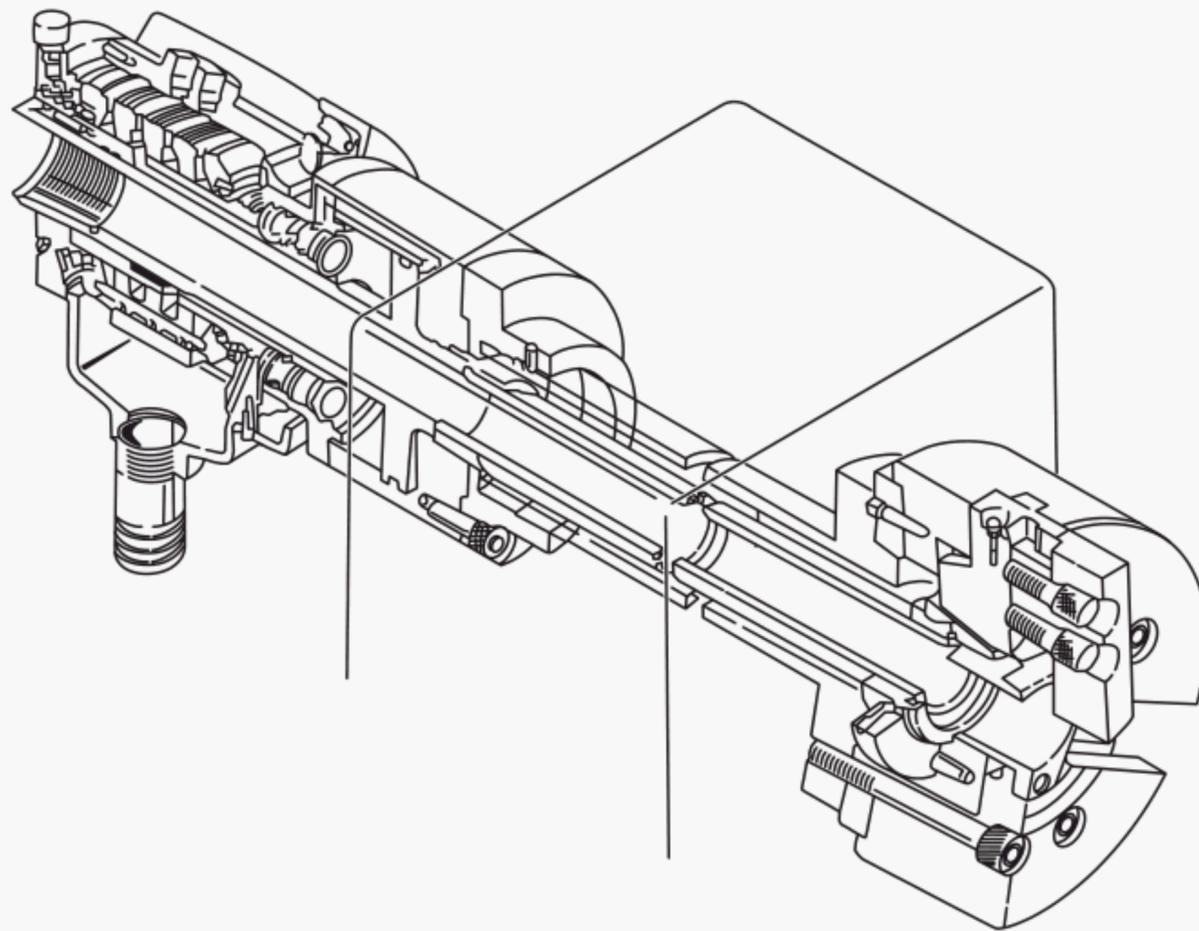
EXAMPLE OF A POWER CHUCK ASSEMBLY
